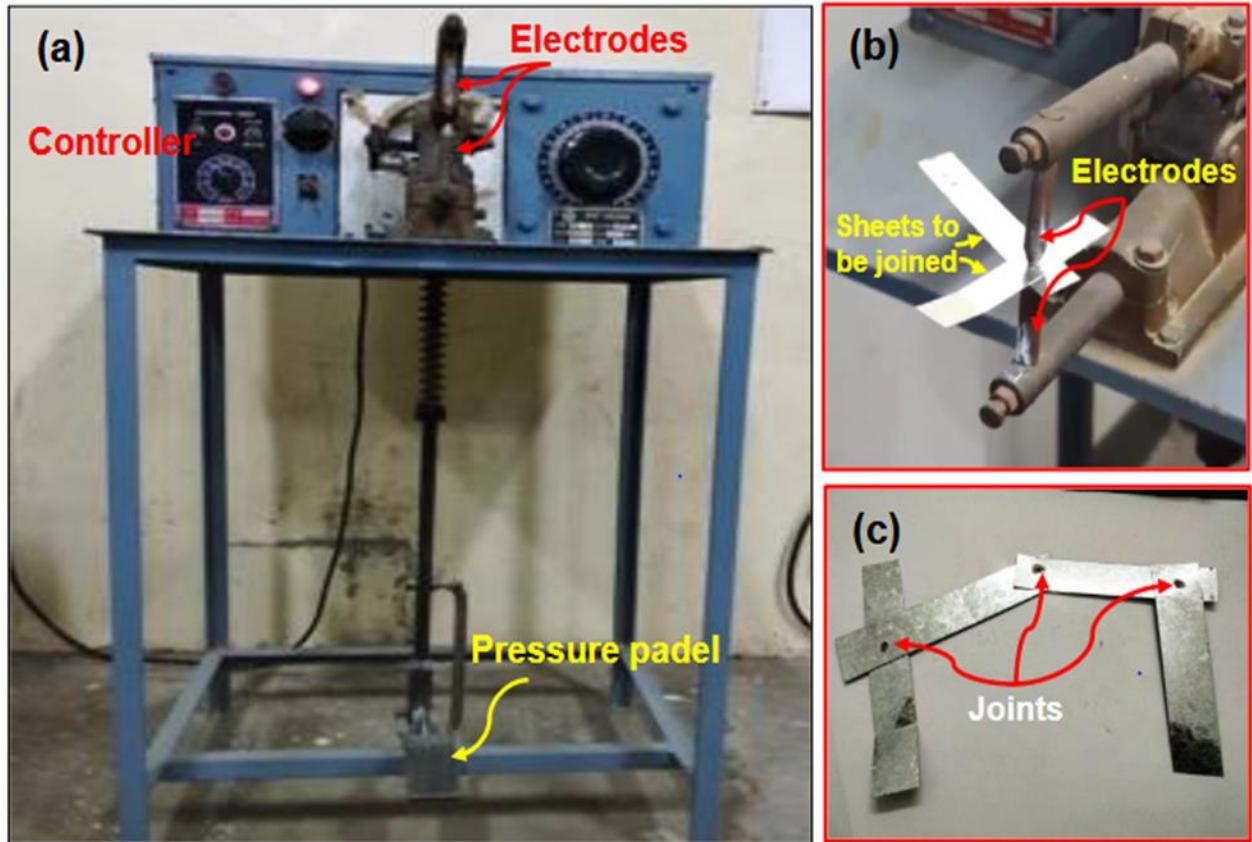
Spot welding (a) setup and (b) process. (c) sheets after spot welding.
